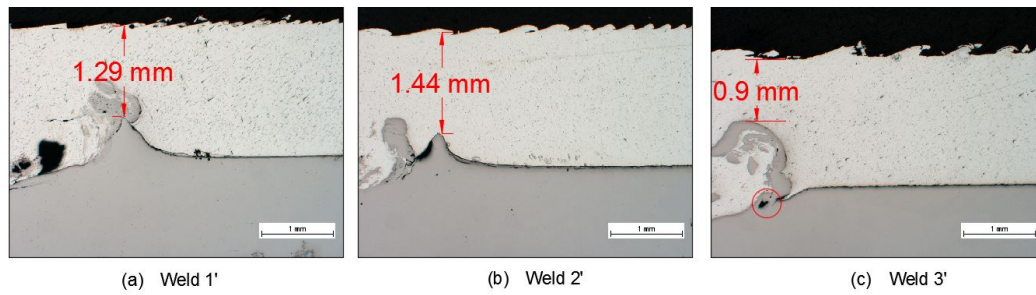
The effective thickness of aluminium alloy sheet of weld 1', weld 2' and weld 3'.
